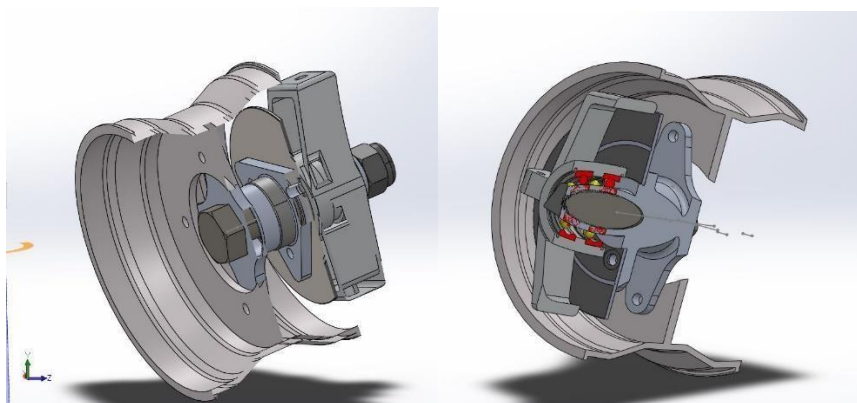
Cross Section View of Wheel Carrier Assembly showing positioning of Bearings and Rotor Disc
